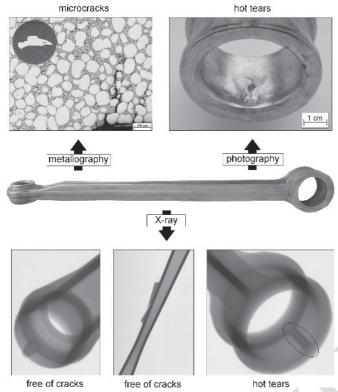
Selected failures of the casting defects of the connecting rod in miscellaneous sizes: microcracks and hot tears.
